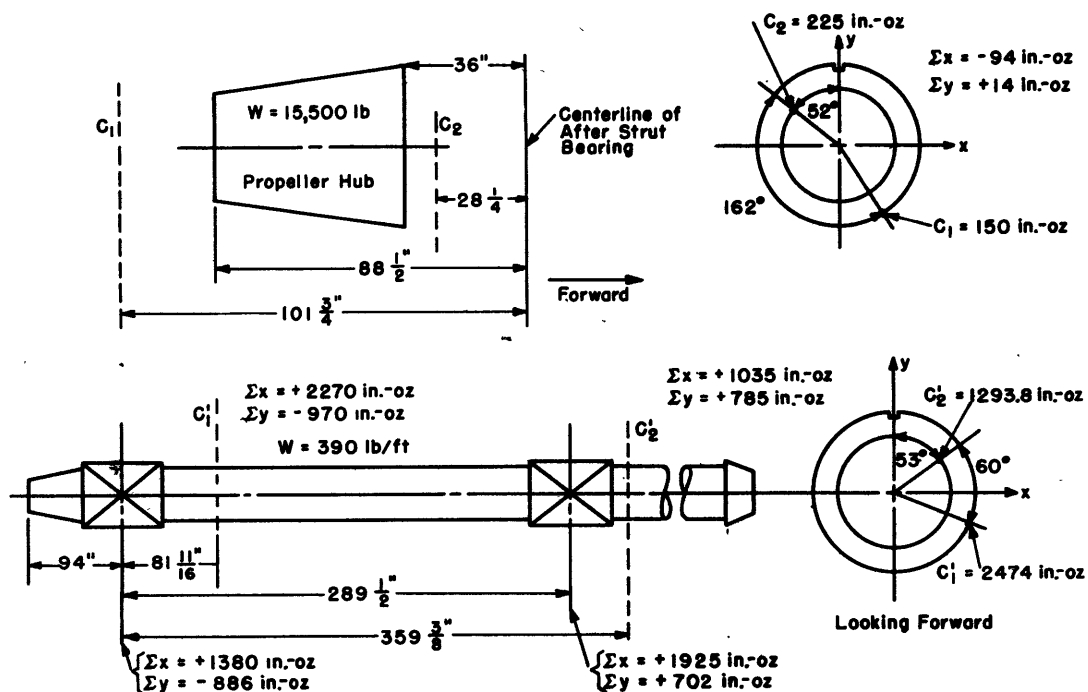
Balancing of the Starboard Tailshaft and Propeller on the DD865
